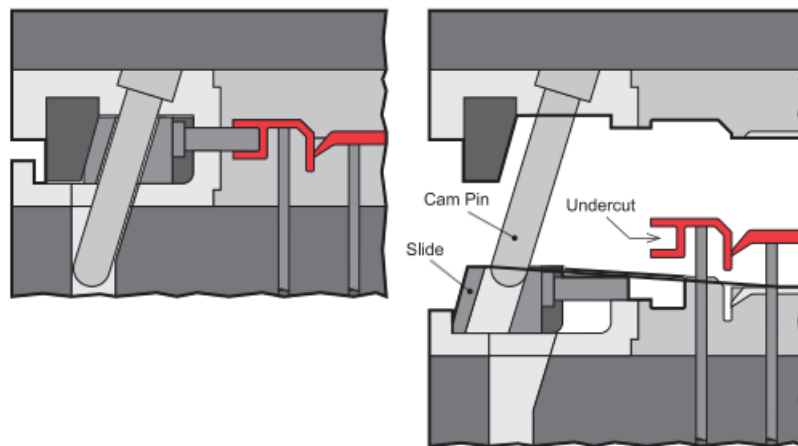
Side-Action Slide (The cam pin retracts the slide during mold opening).
